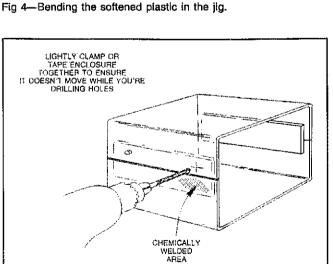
Drilling holes prior to tapping for joining screws. Though not shown in this drawing, the acrylic piece should be backed up with a wooden block to minimize the possibility of splitting the plastic. Make the hole in the outer half clamshell large enough to pass the machine-screw body (see Fig 7).
